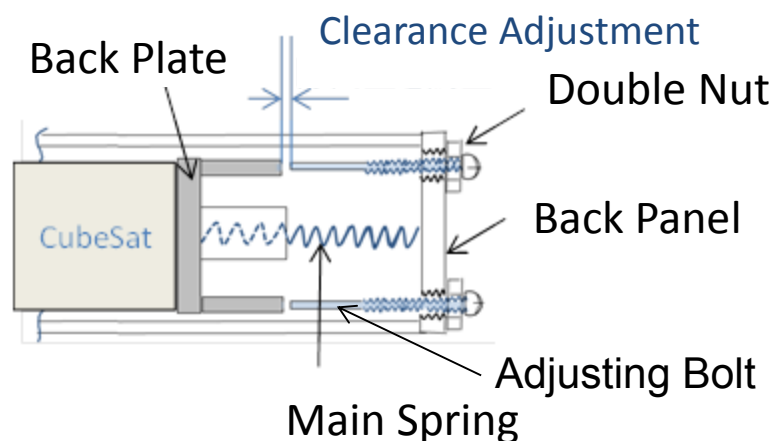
Back Plate and Adjusting Bolts of E-SSOD
